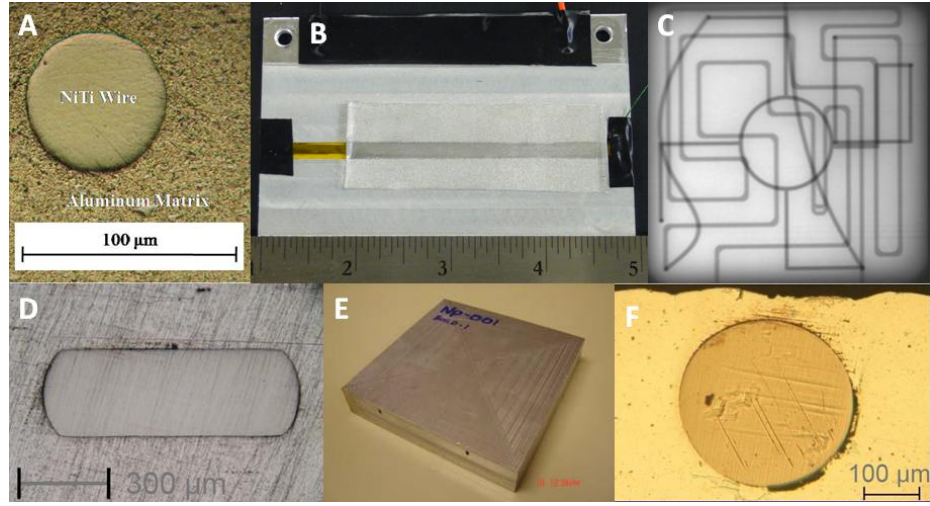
A: NiTi wire embedded into Al 3003 – H18 using only plastic flow of Al sheet [28]. B: 3.175 mm wide, 25.4 μm thick PVDF ribbon wrapped with Kapton insulating tape and embedded into Al 3003 – H18 [29]. C: X-RAY of part shown in E, showing embedded channels (courtesy Edison Welding Institute). D: NiTi ribbon embedded into Al 3003–H18 using only plastic flow of Al sheet [29]. E: bulk aluminum part with embedded channels (courtesy Edison Welding Institute). F: 381 μm NiTi wire embedded into Al 3003 – H18 using only plastic flow of Al sheet [27].
